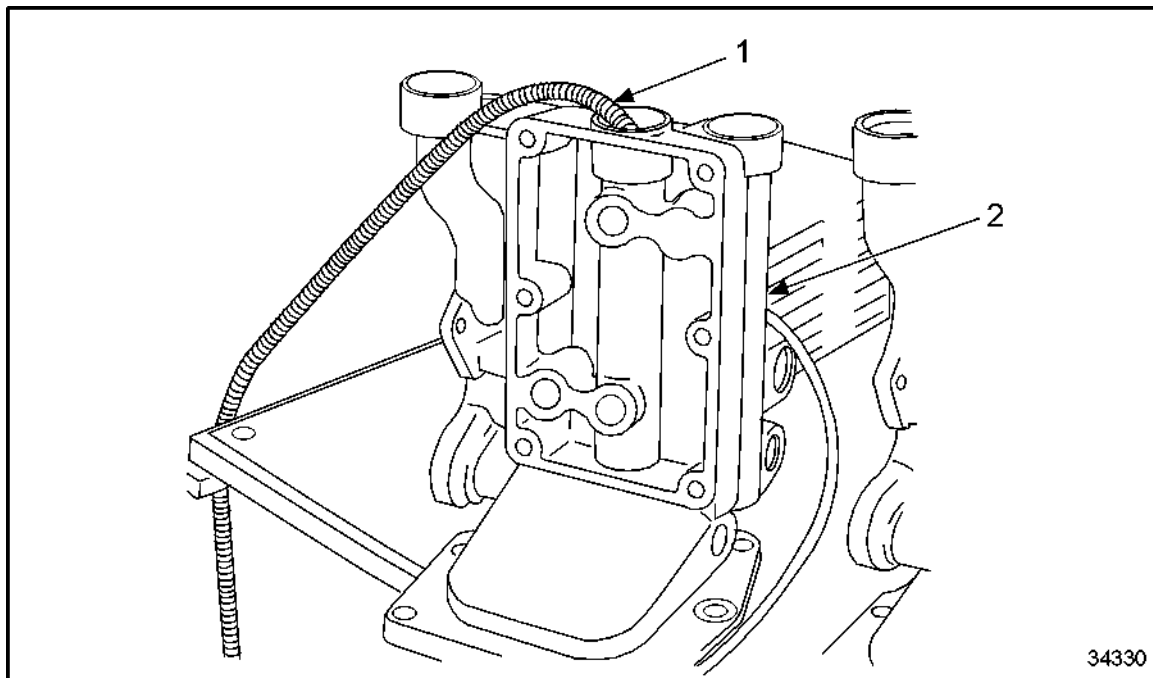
Removing Blanking Plug and Threaded Connection from Filter Head and Junction Block
